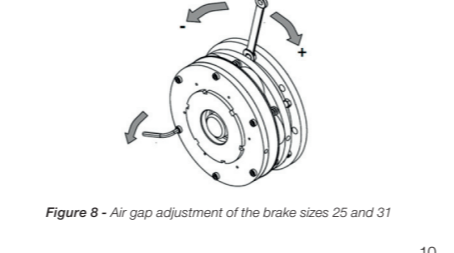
Air gap adjustment of the brake sizes 25 and 31
